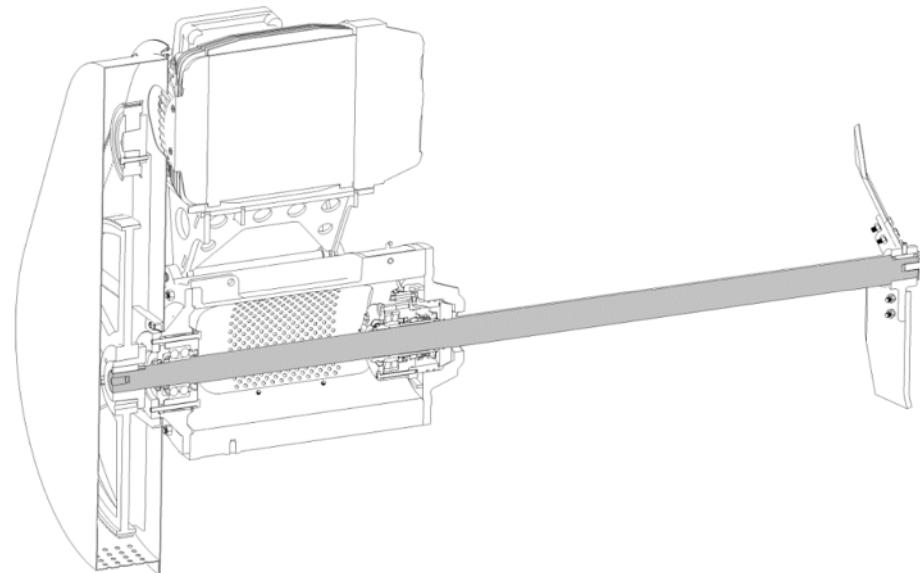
Mixer Assembly with One Piece Impeller Shaft
